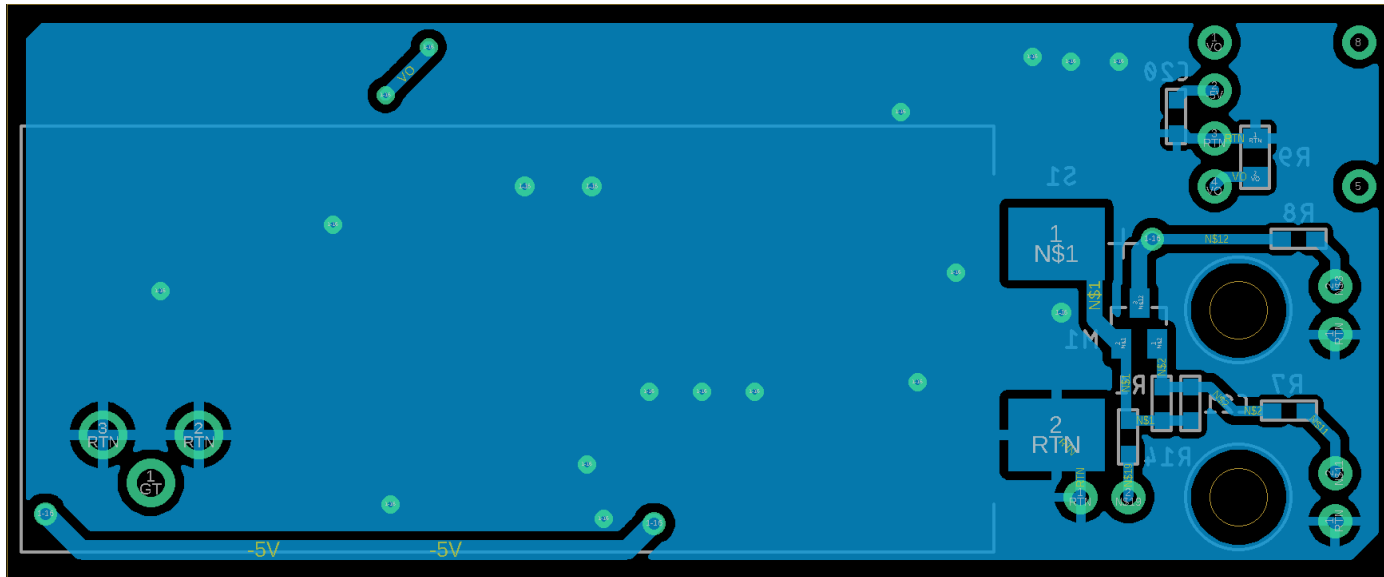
Bottom copper and silkscreen PCB layers of the battery-powered gate-driver design (scale: 2.5:1)
